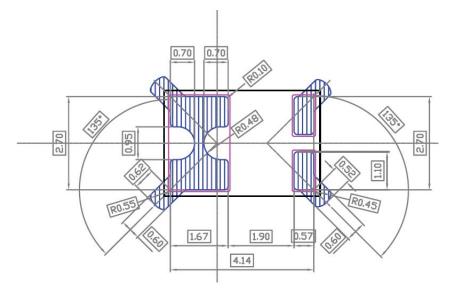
Solder stencil for footprint with two thermal vias and four solder ability indicators.
